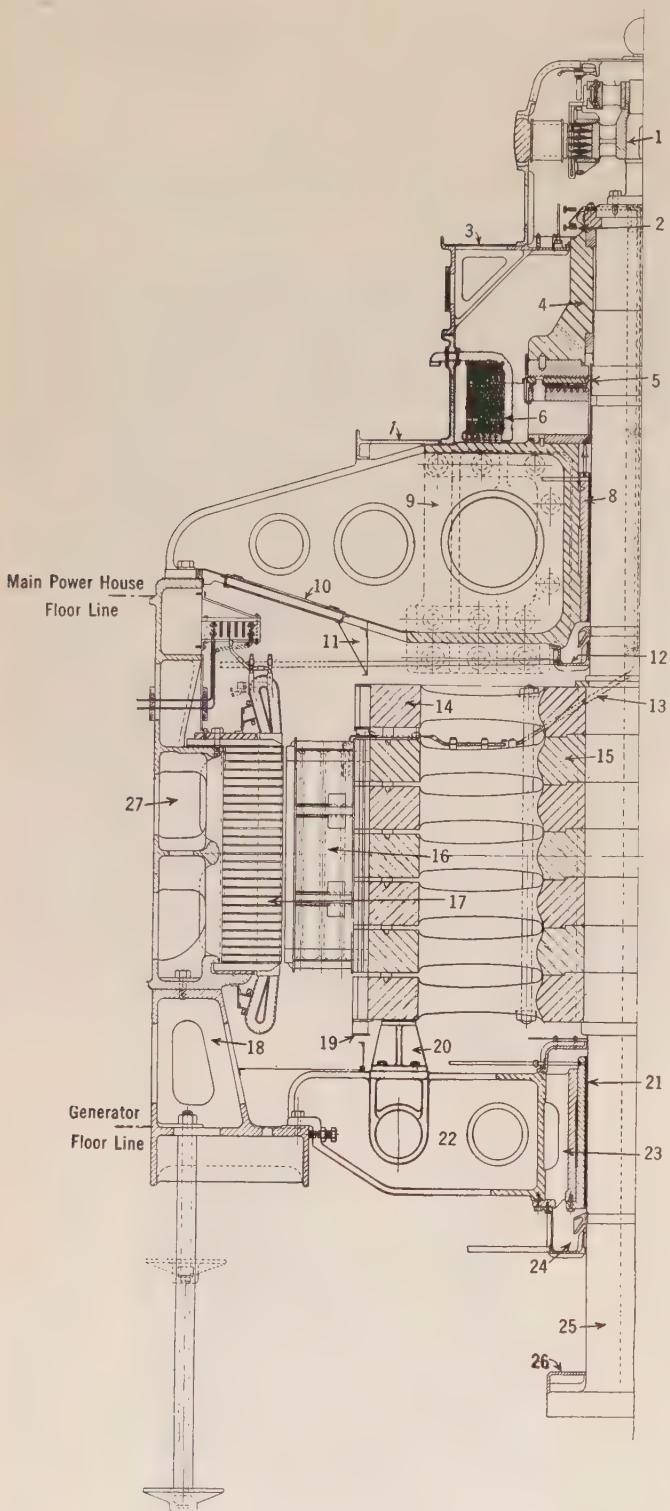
COMPLETE ASSEMBLY SECTION OF UNIT
